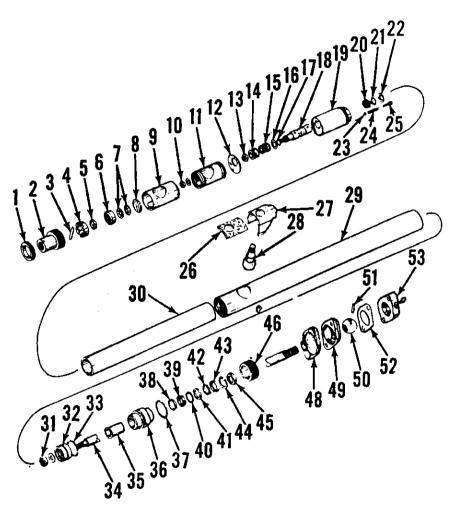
Exploded view of Series B-414, 354, 364 and 384 power steering cylinder and valve assembly. Refer to Fig. 12 for view of connecting link which fits into take-off extension (2).
